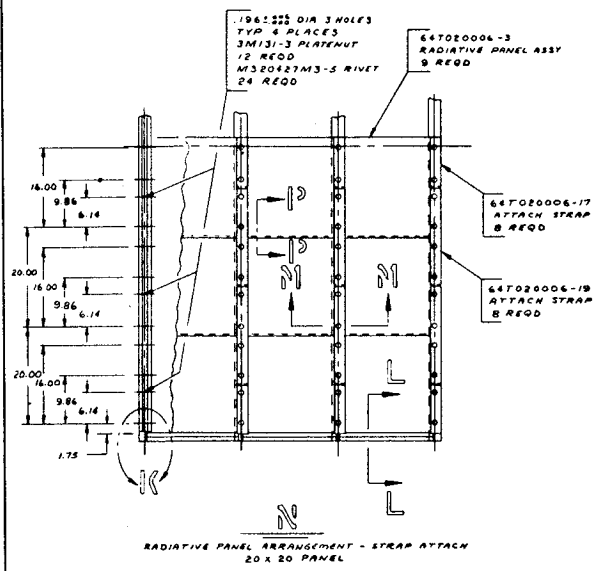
T020006. - This drawing (figure 45) details the present phase B shuttle baseline design. This attachment concept is similar to that of concept 7A (pi-strap attach). However, the two pi-strap feet are deleted and panels are held in place by flat, 2.34 inch wide straps. The panel skin extends across the attach joint and overlaps the adjacent panel providing a more positive, moisture-proof joint similar to house shingles. The middle support of concept 7B is deleted.
